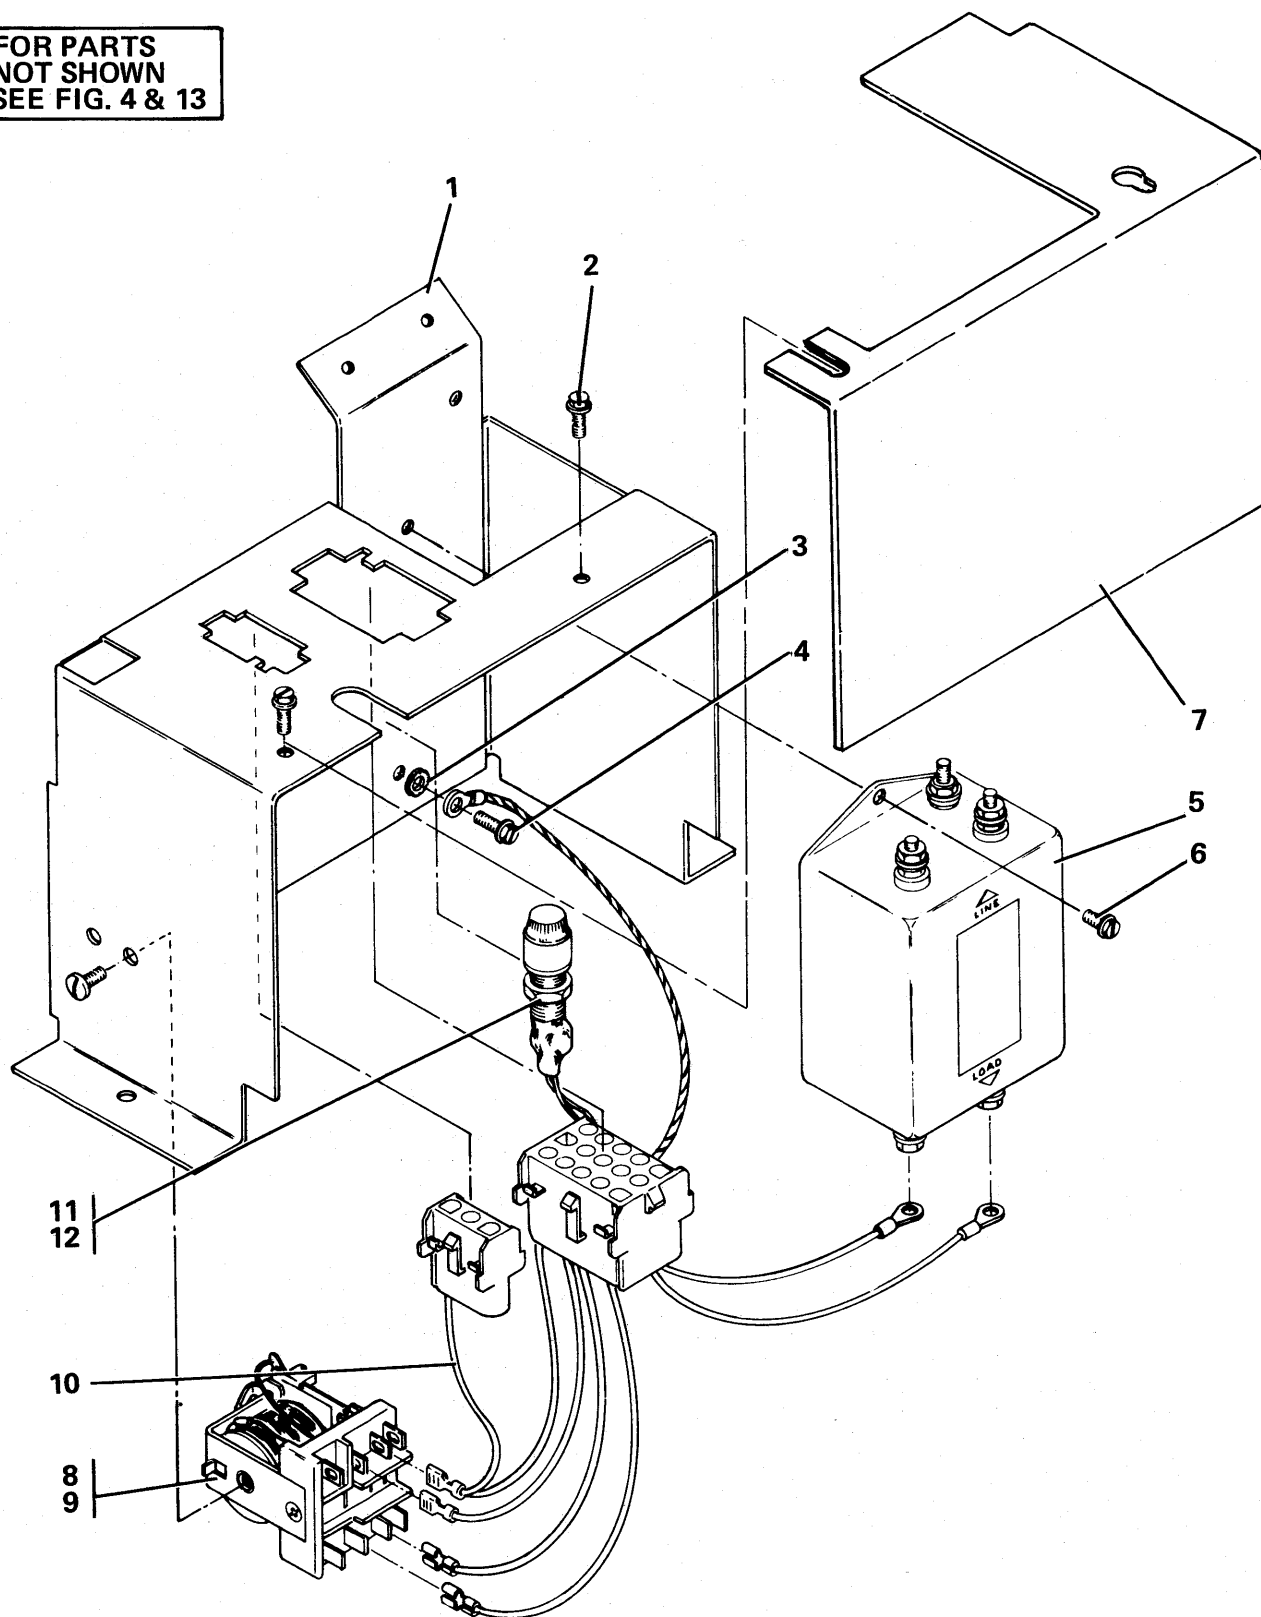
AC BOX ASSEMBLY. SEE LIST 11.
